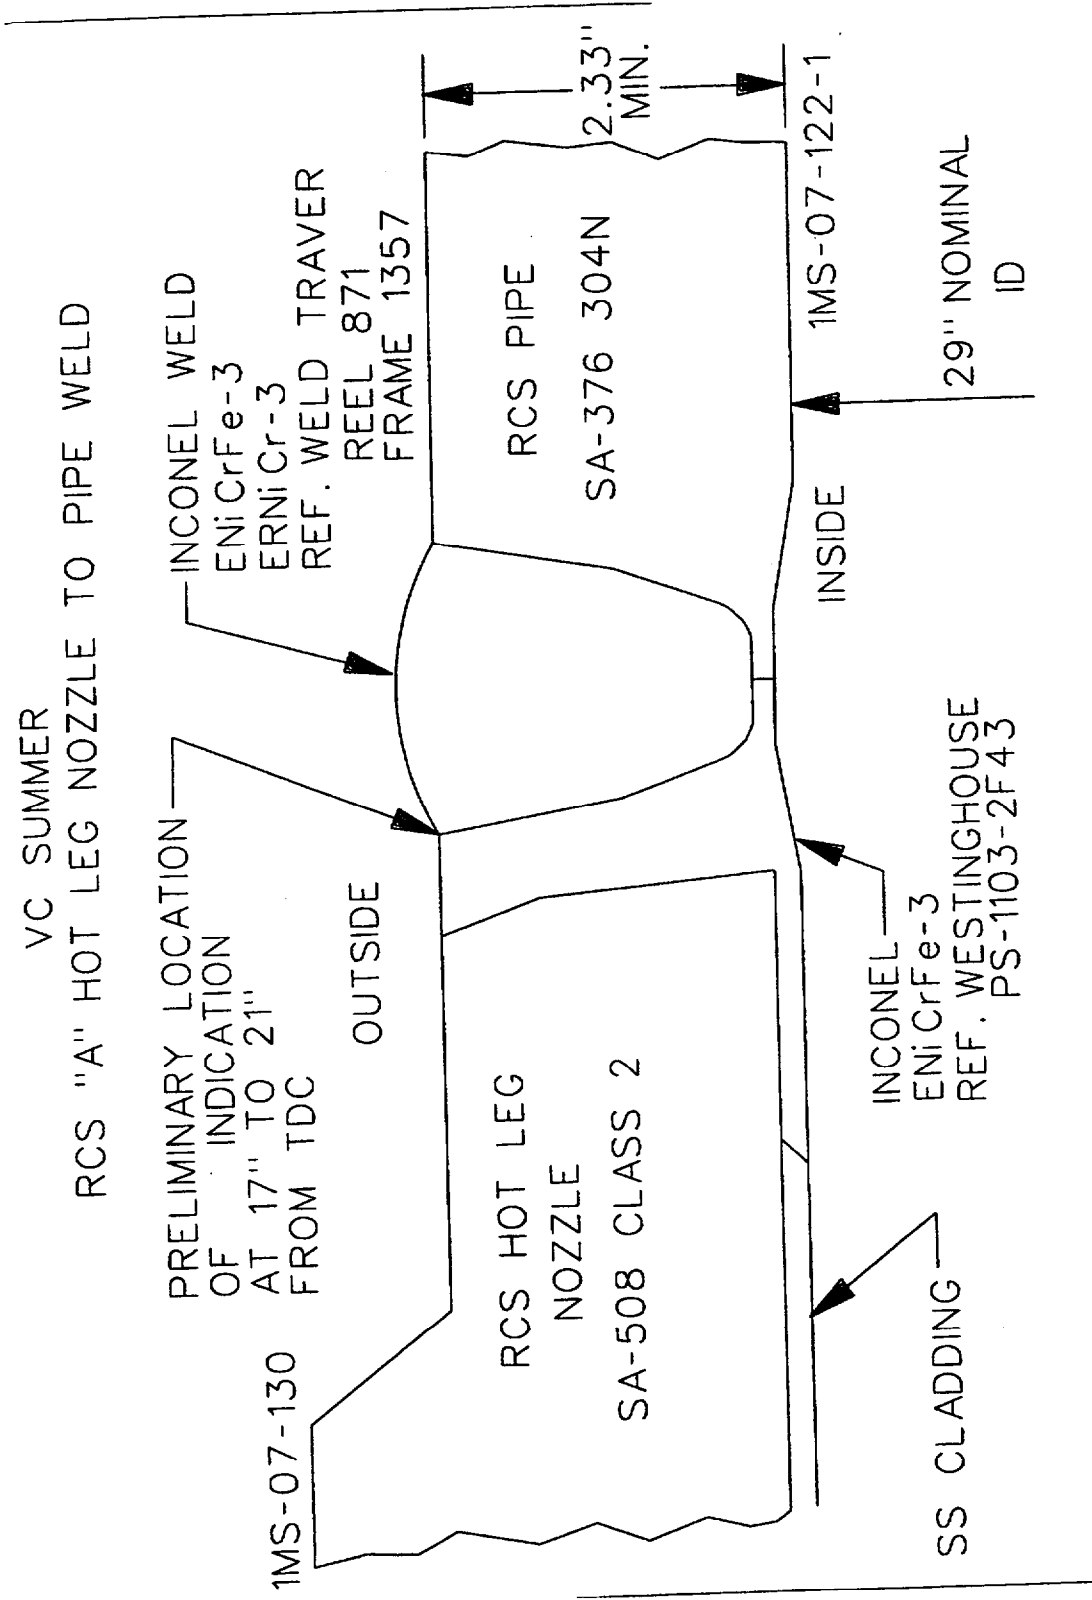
Geometry of Nozzle to Pipe Weld Region - V. C. Sumner
